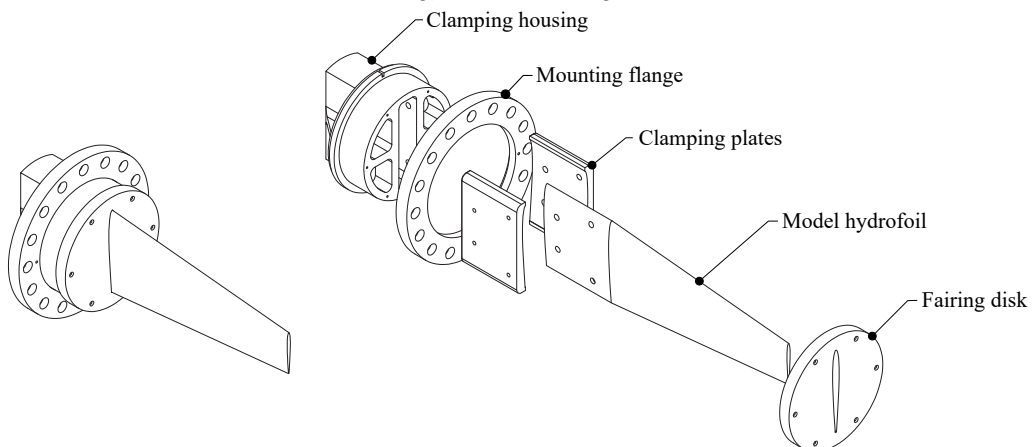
Hydrofoil model assembly showing an exploded view of the clamping housing arrangement that allows continuity of the model.
